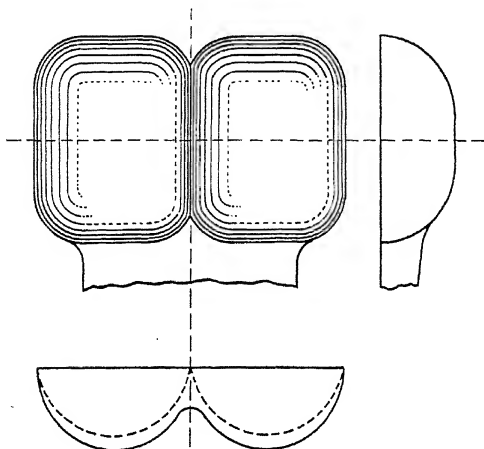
PELTON WHEEL BUCKETS (EXTERNAL VIEWS)
